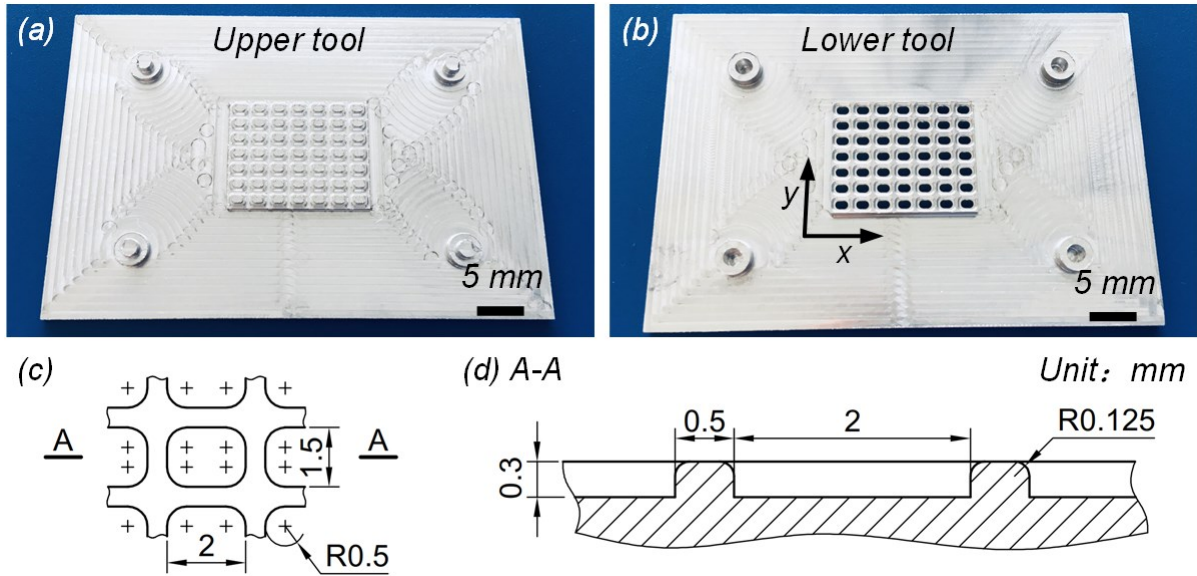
Upper tool (a) and lower tool (b) with rectangular micro structures. The top view (c) and cross-sectional view (d) of rectangular micro structures on the lower tool.
